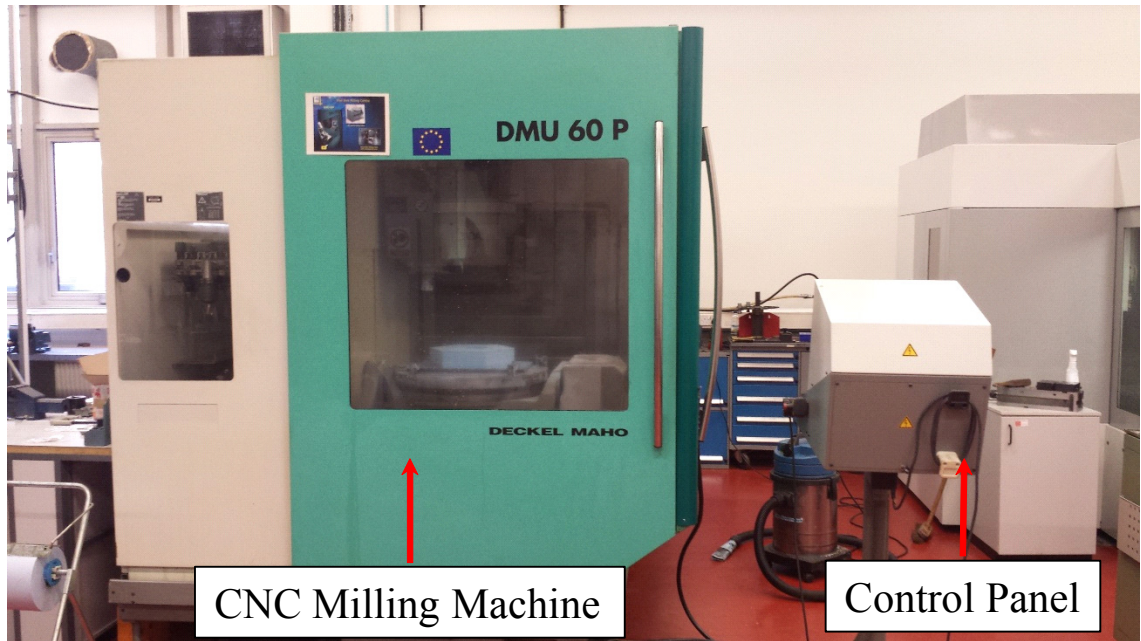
CNC milling machine for producing the curvatures on the enclosure ends.
